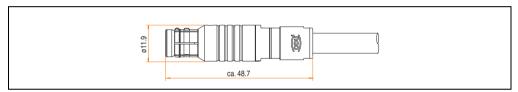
Plug dimensions (ODU Minisnap) - X2X cable 5CAX2X.0xxx-20
